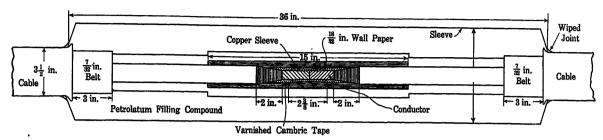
CONSTRUCTION AND DIMENSIONS OF IMPREGNATED-PAPER JOINT Three-conductor 300,000-cir. mil, round type, 33,000 volts
